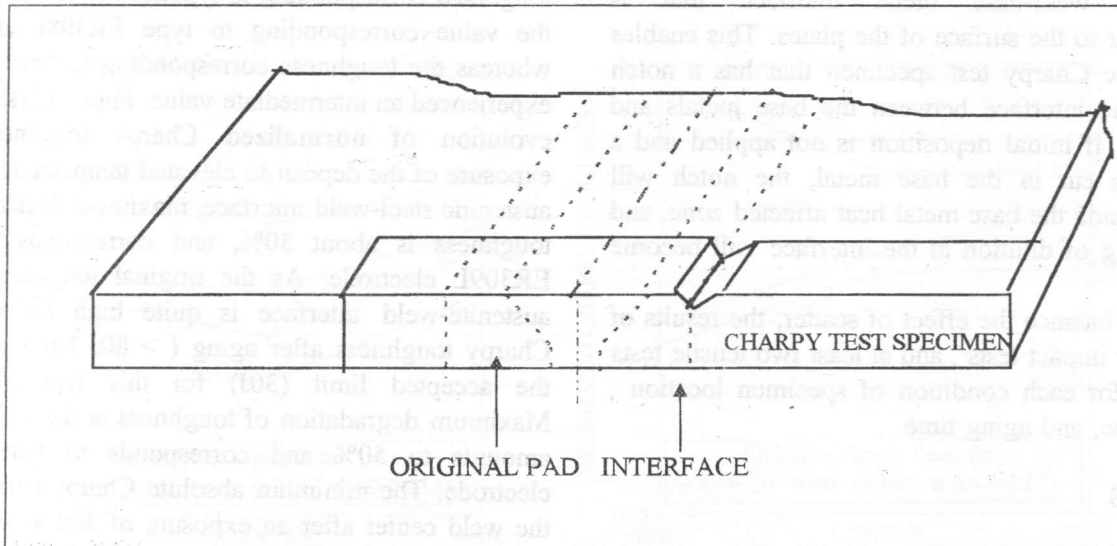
Charpy impact test specimen taken at the interface between weld metal and base metal
